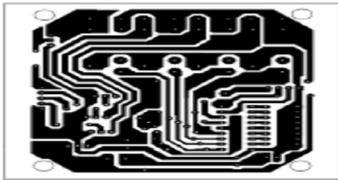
Actual-size, single-side PCB for the transmitter circuit
